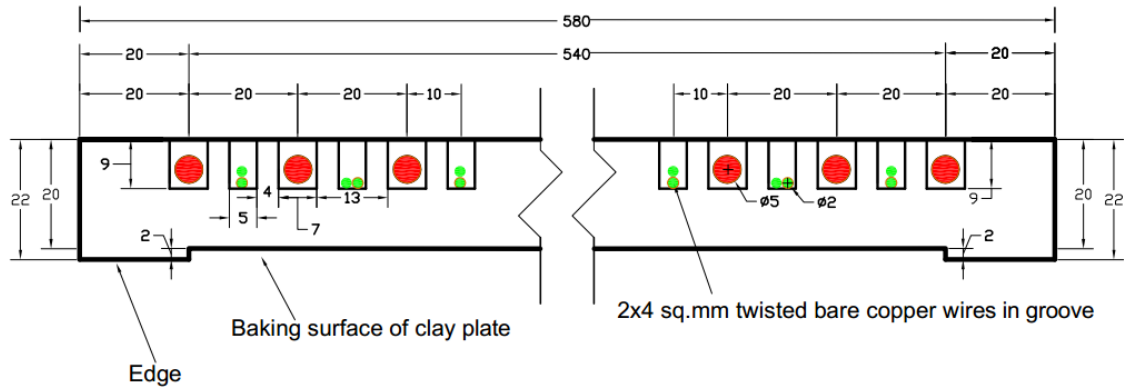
Section C-C view of the clay plate of 58 cm diameter with heating element placed, CuWE, and sealed (NTS).
